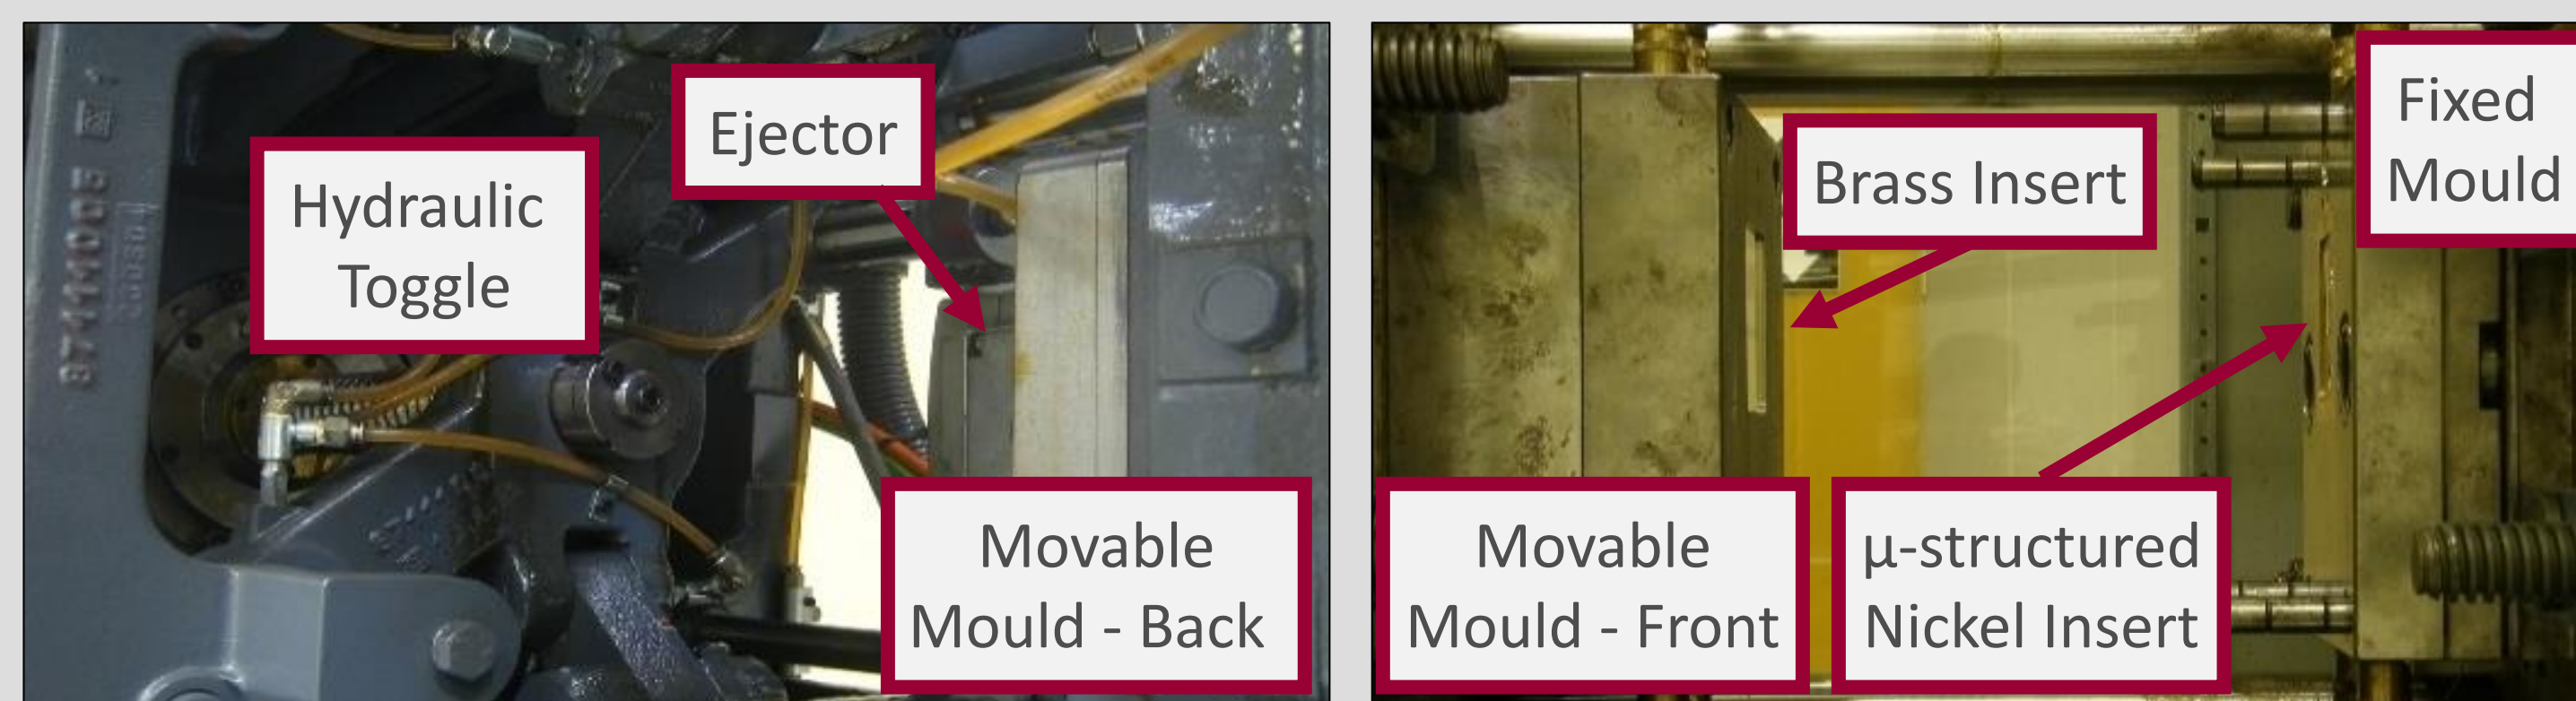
Toggle clamp unit of the ICM machine (left) and moulds in open position (right)
